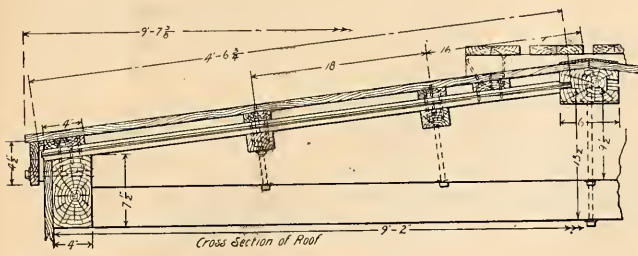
SECTION THROUGH ROOF—80,000 LBS. CAPACITY STEEL UNDERFRAME BOX CARS—ILLINOIS CENTRAL RAILROAD.
